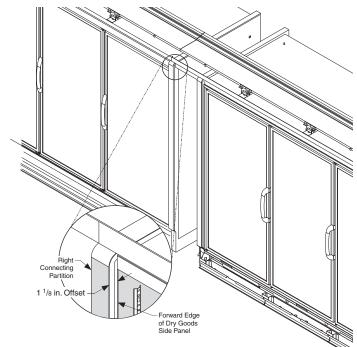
Join Merchandiser with Dry Goods Cabinet (right) to Right End Assembly in Lineup
